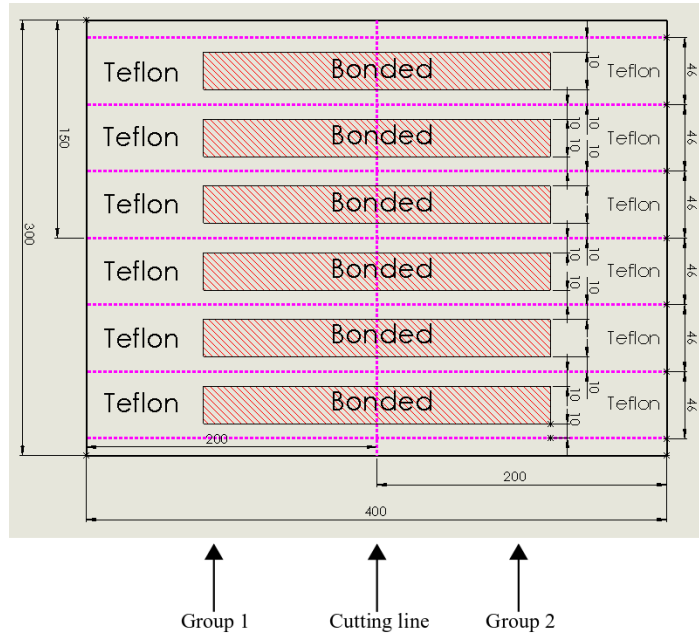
Example of plate layout used for manufacturing sandwich specimens.
